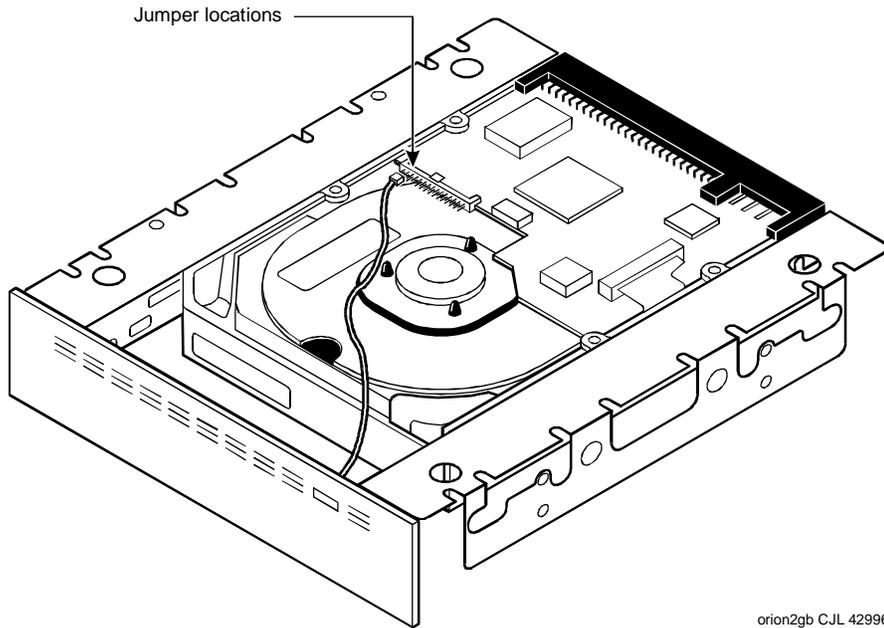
Jumper Settings for Type A SCSI Hard Disk Drive 1 (Second Drive)
